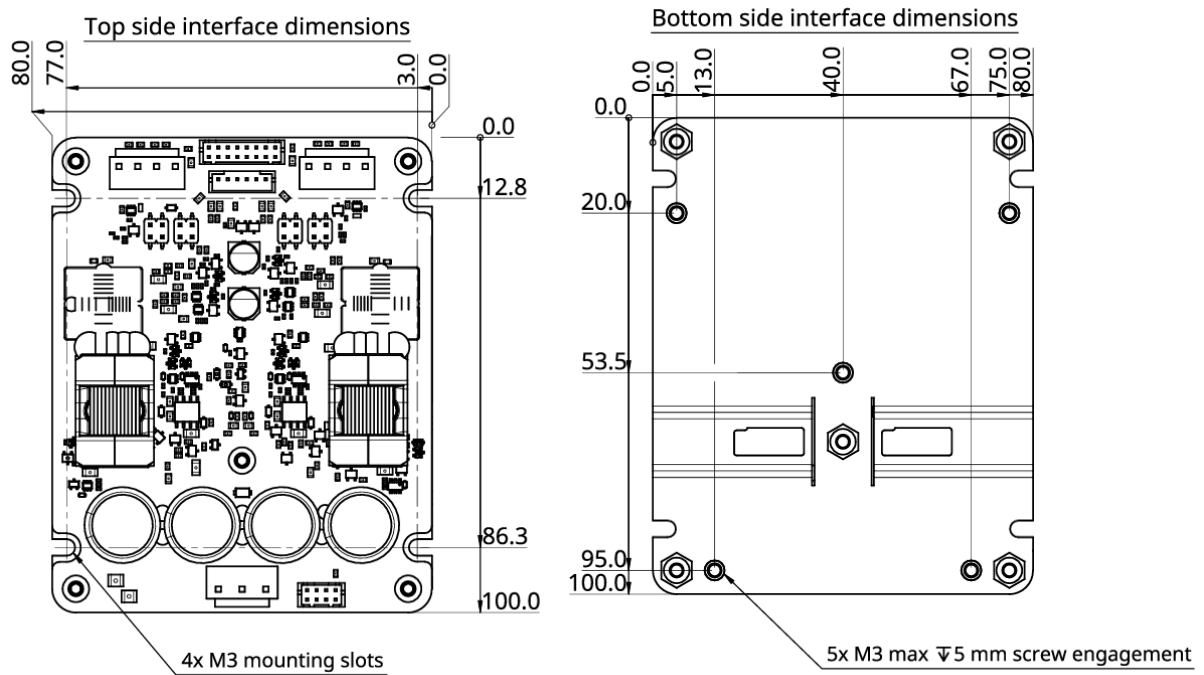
ICEpowerSC400A2 Top view bottom side mounting holes and Bottom view showing 5 bottom mounting holes.
